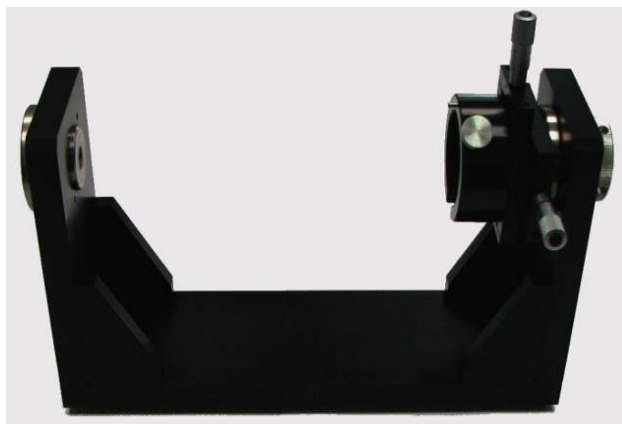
A-808 Calibration Fixture with X-Y Target Stage for T-218/219 Targets and L-705/706 Laser Mount
